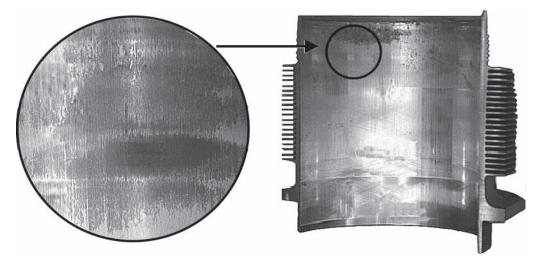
Cylinder Barrel Scoring and Piston Rub
